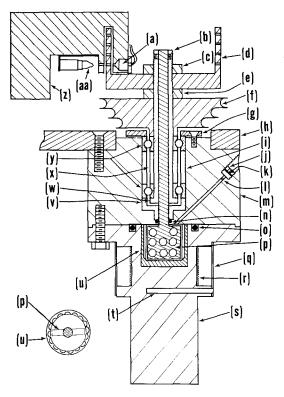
Sectional view of a precision hydrogenator. (a) Phototransistor; (b) drive shaft; (c) nut; (d) optical tachometer cup; (e) spacer; (f) pulley; (g) bearing retaining plate; (h) mounting bracket; (i) bearing spacer; (j) septum nut; (k) rubber septum; (l) gas inlet tube; (m) base; (n) stirring paddle seal "O" ring; (o) reaction chamber seal "O" ring; (p) stirring paddle; (q) shield; (r) heating wire; (s) reaction-chamber heating block; (t) thermistor well; (u) stainless steel reaction chamber; (v) "O" ring support; (w) drive shaft lip; (x) bearing spacer; (y) ball bearings; (z) lamp-support block; (aa) prefocused lamp.
